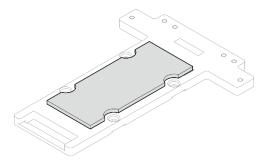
E3.S middle cold plate bottom side single-use gap pad location
